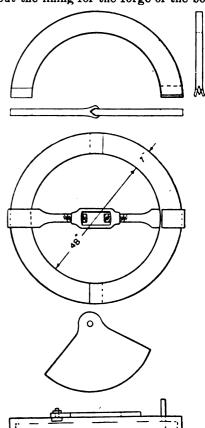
METHOD OF BENDING AND WELDING A FLAT RING.
